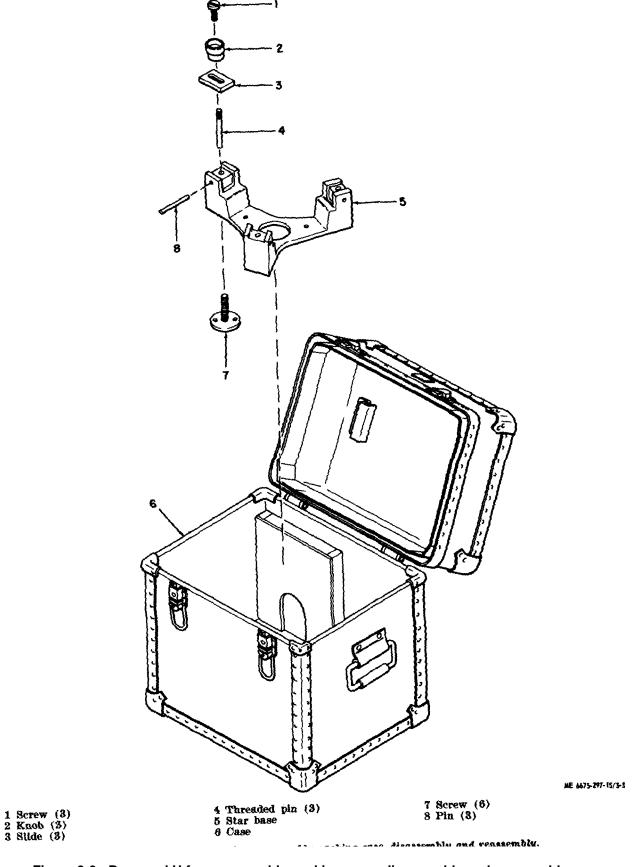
Base and U-frame assembly packing case, disassembly and reassembly.
